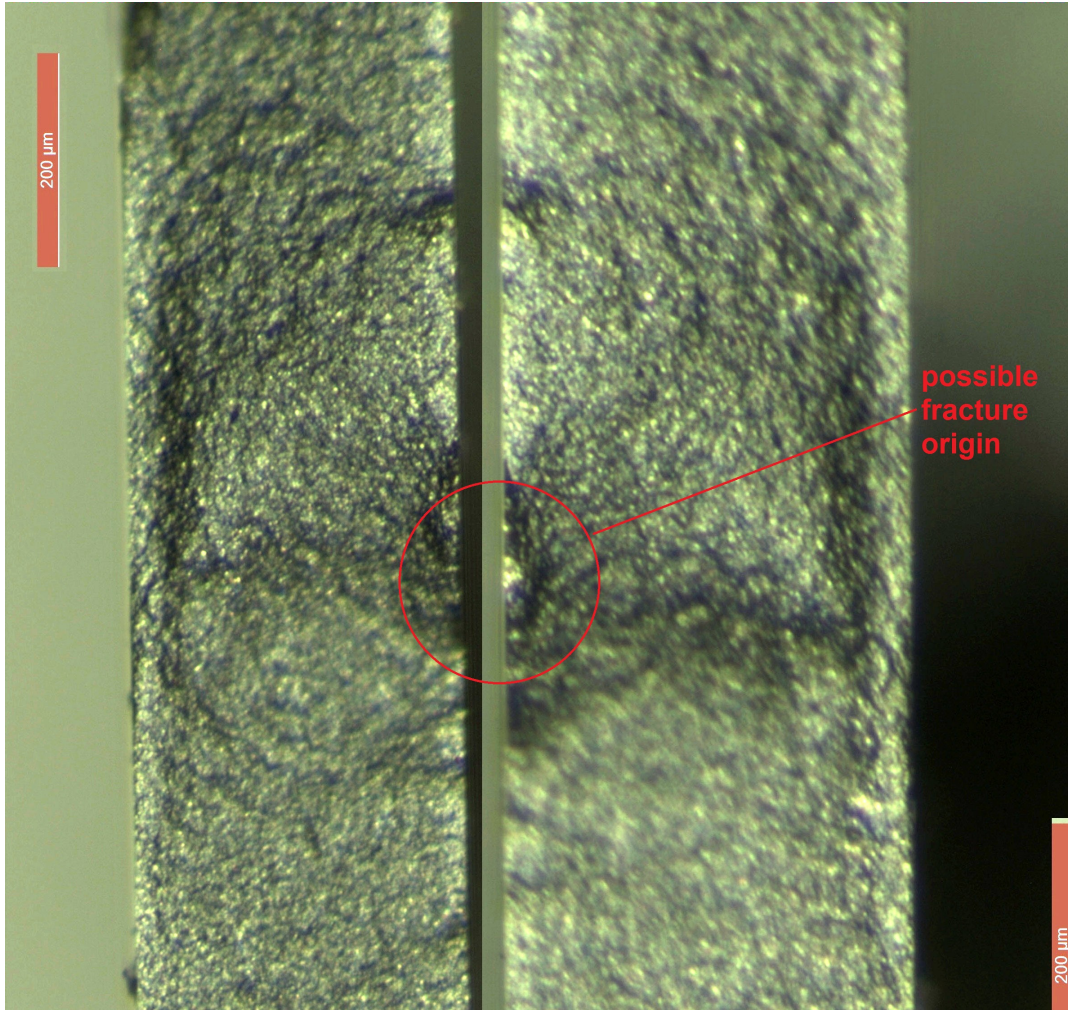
fracture surface of sample 5a taken with the stereo microscope
